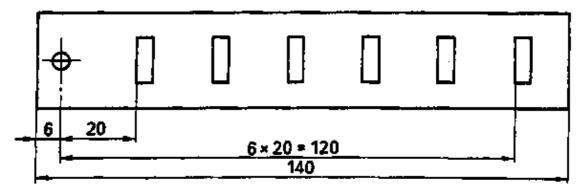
Rectangular openings, dimensioned from edge to edge
